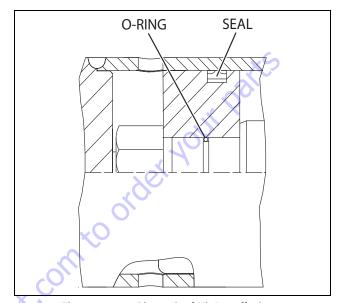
Piston Seal Kit Installation (Prior to S/N 0300142664)
